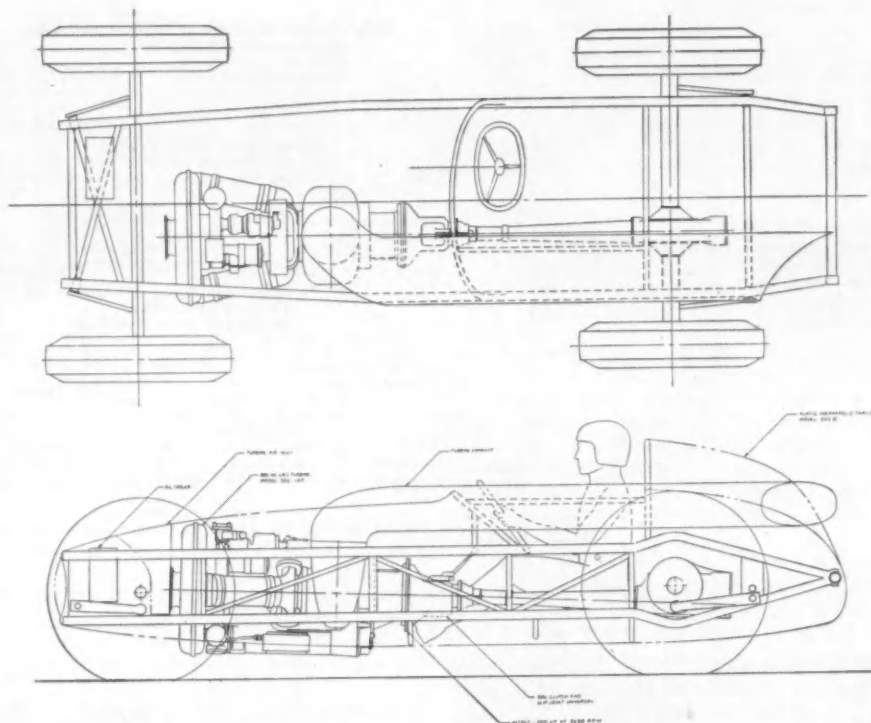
One possible arrangement of engine and chassis in which Boeing 502-10F turbine engine is mounted in Kurtis 500D chassis.
